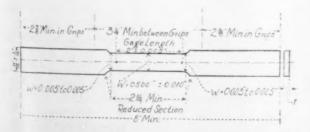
ASTM Standard sheet specimen, Designation E8-46.
